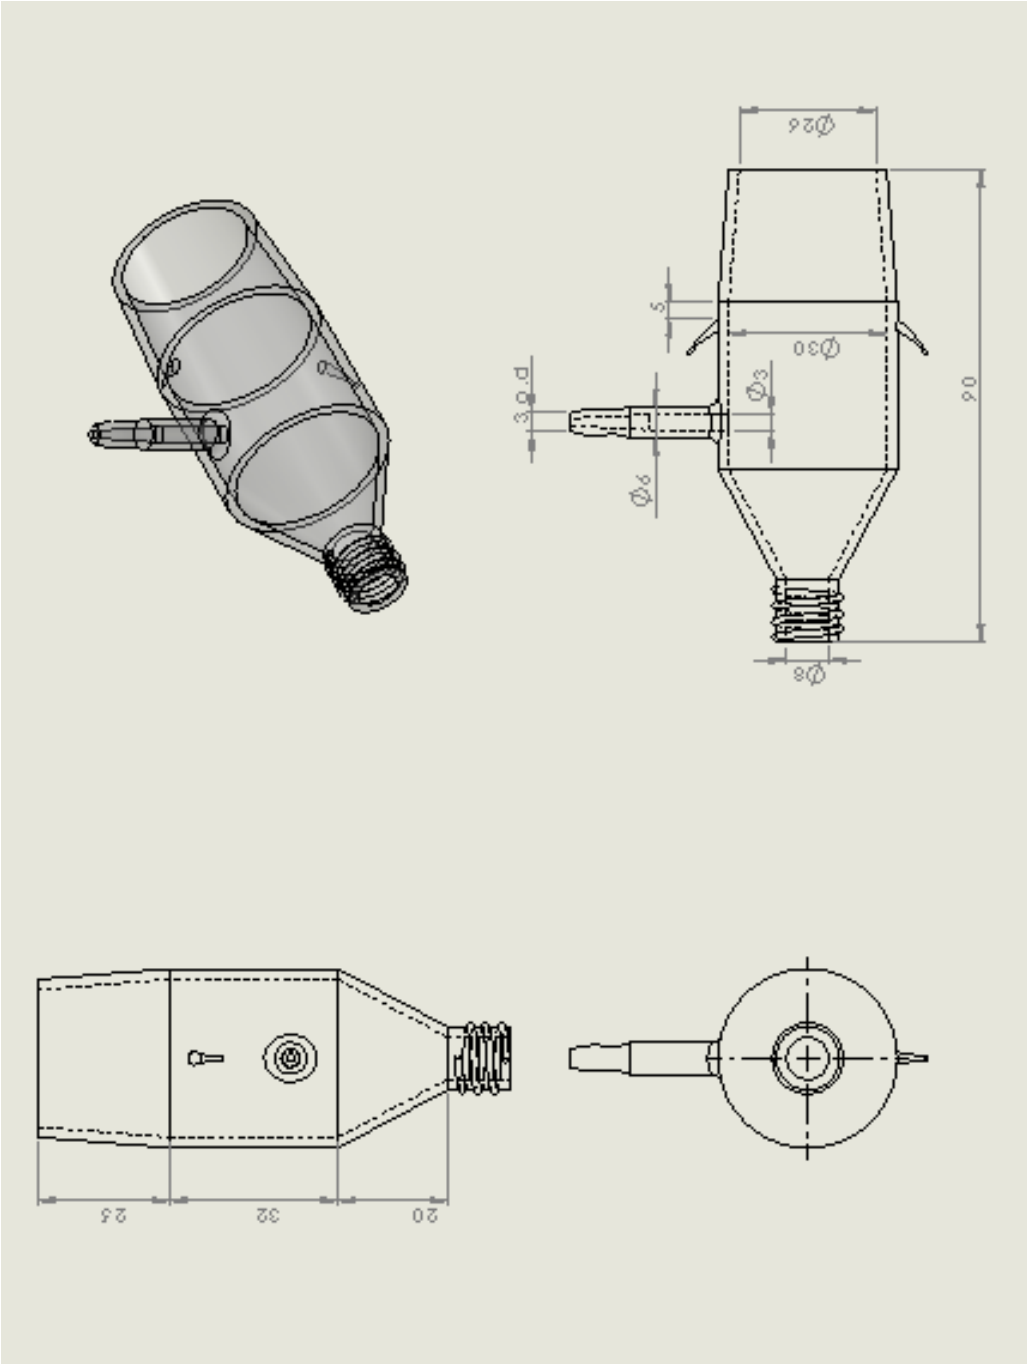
Drawing of the «Bufferglass short end» with dimensions.
